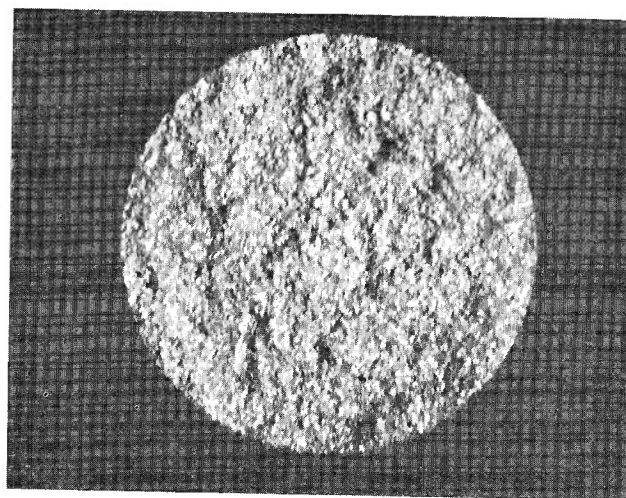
Flick Inspection Results and 10X Black and White Photographs of Fracture Faces of Weak Specimen A18W from ATJ-S Billet L-1-8
